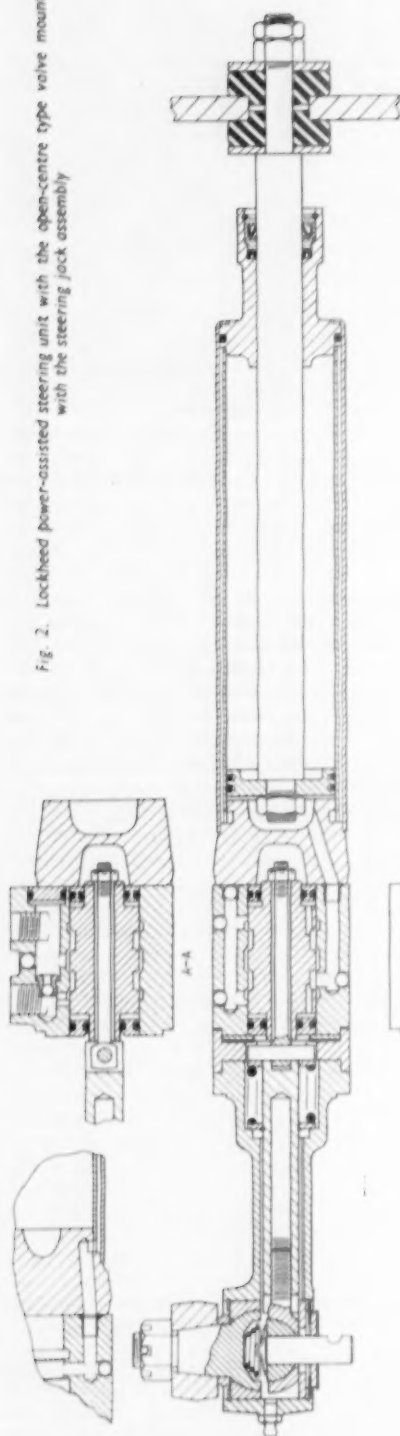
Lockheed power-assisted steering unit with the open-centre type valve mounted in line with the steering jock assembly
